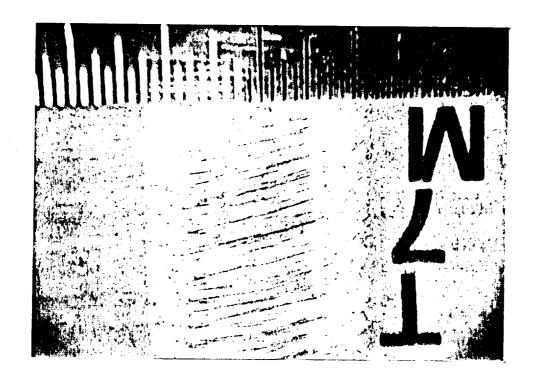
A Weld made with 260 ppm Oxygen in shield. Keyhole. Front. t7i,t7m
